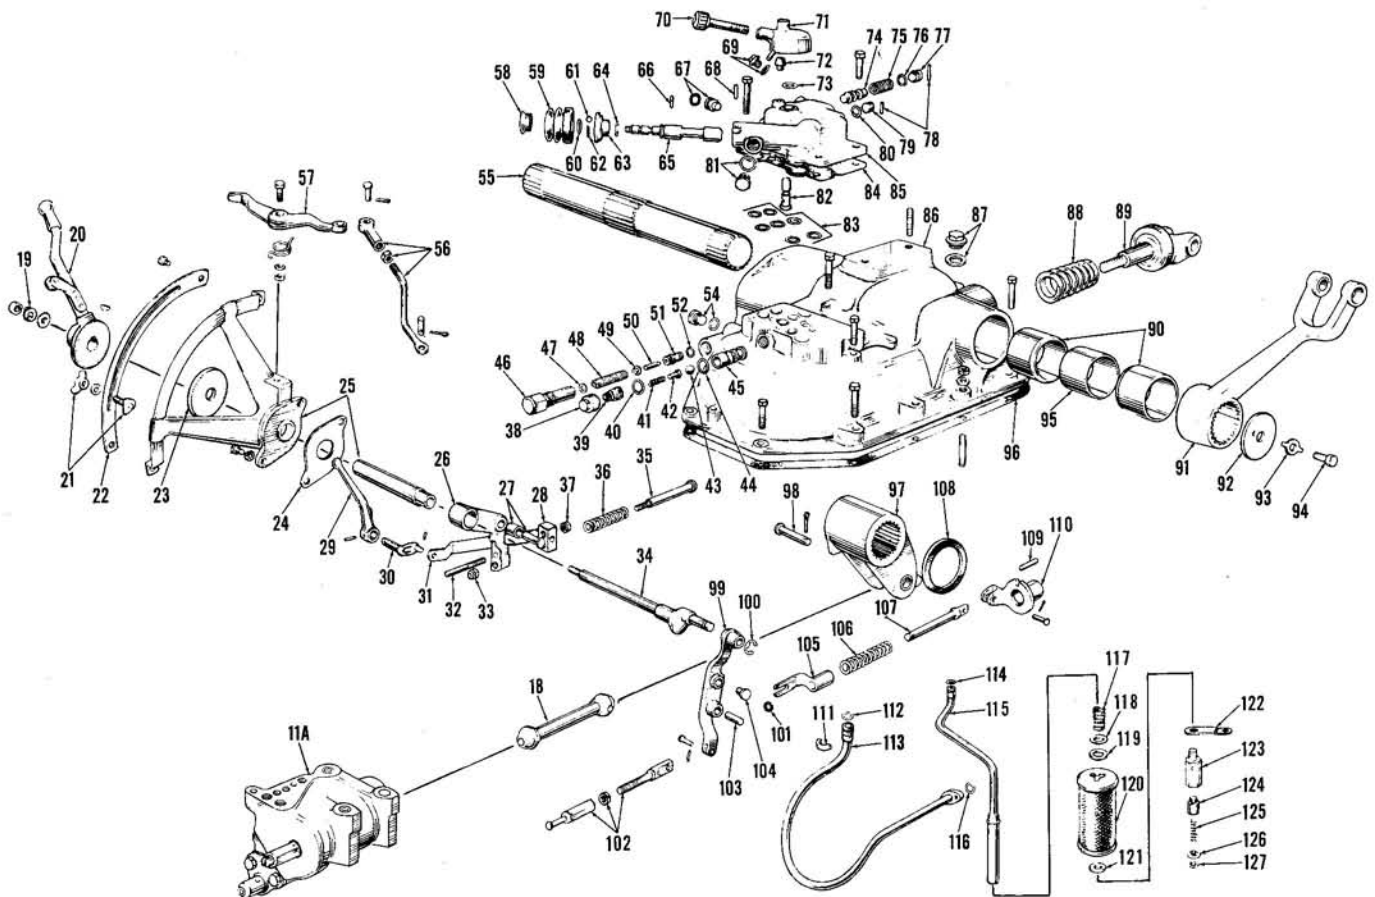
Exploded view of model "FSM" lift cover assembly. Refer to Fig. 211 for exploded view of lift cylinder (11A). Refer to Fig. 203 for model "New FSM" linkage. Figs. 196 and 209 show production changes in pressure relief valve and check valve seats applicable to both models "FSM" and "New FSM."
